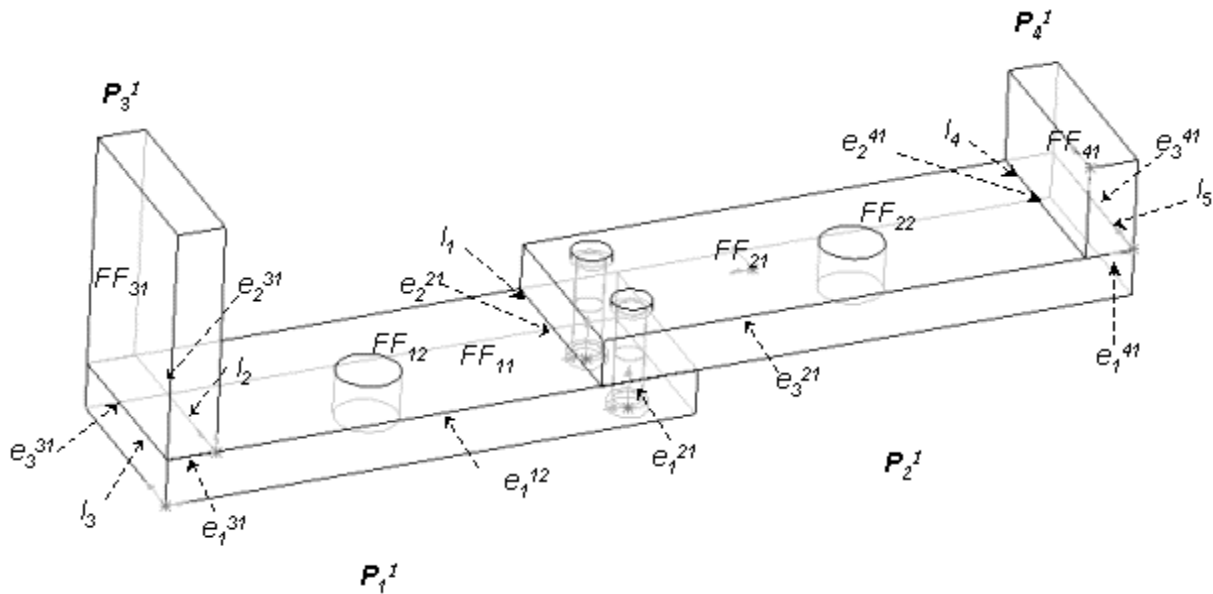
Connector assembly with two welded joints and one pin joint
